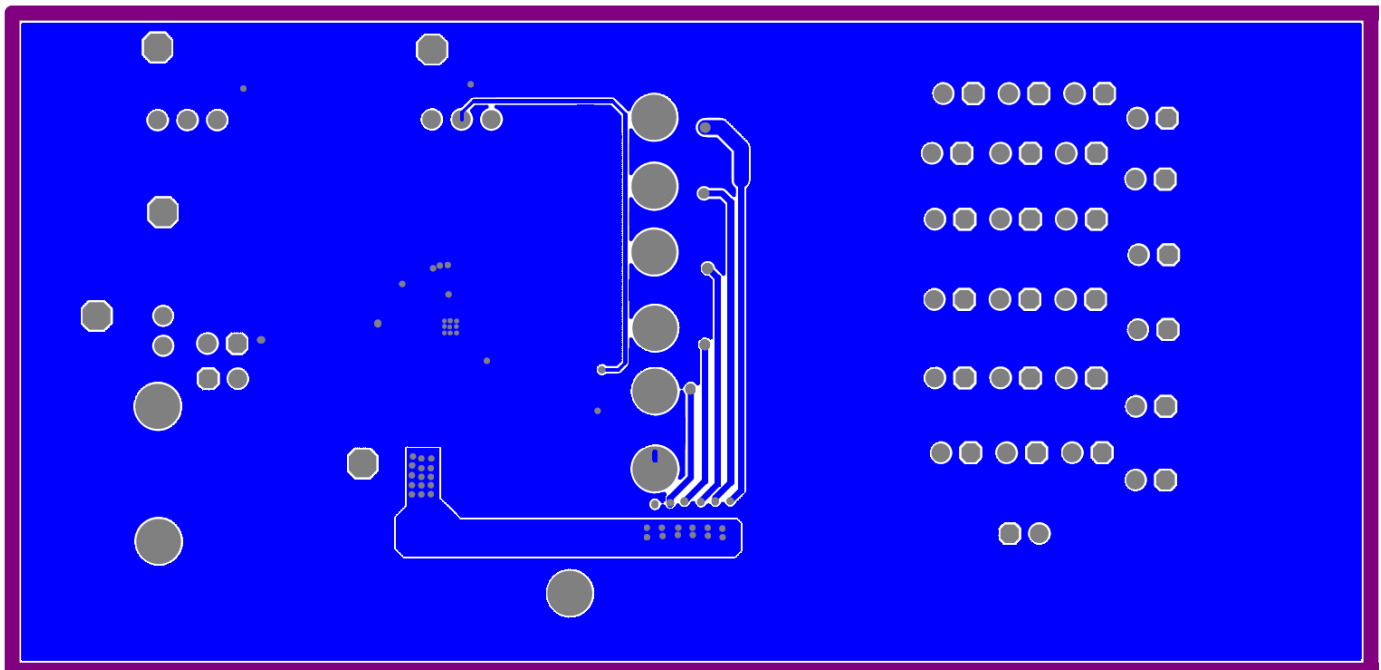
PCB LAYOUT (BOTTOM LAYER) OF ISL97693IRTZ-EVALZ BOARD
